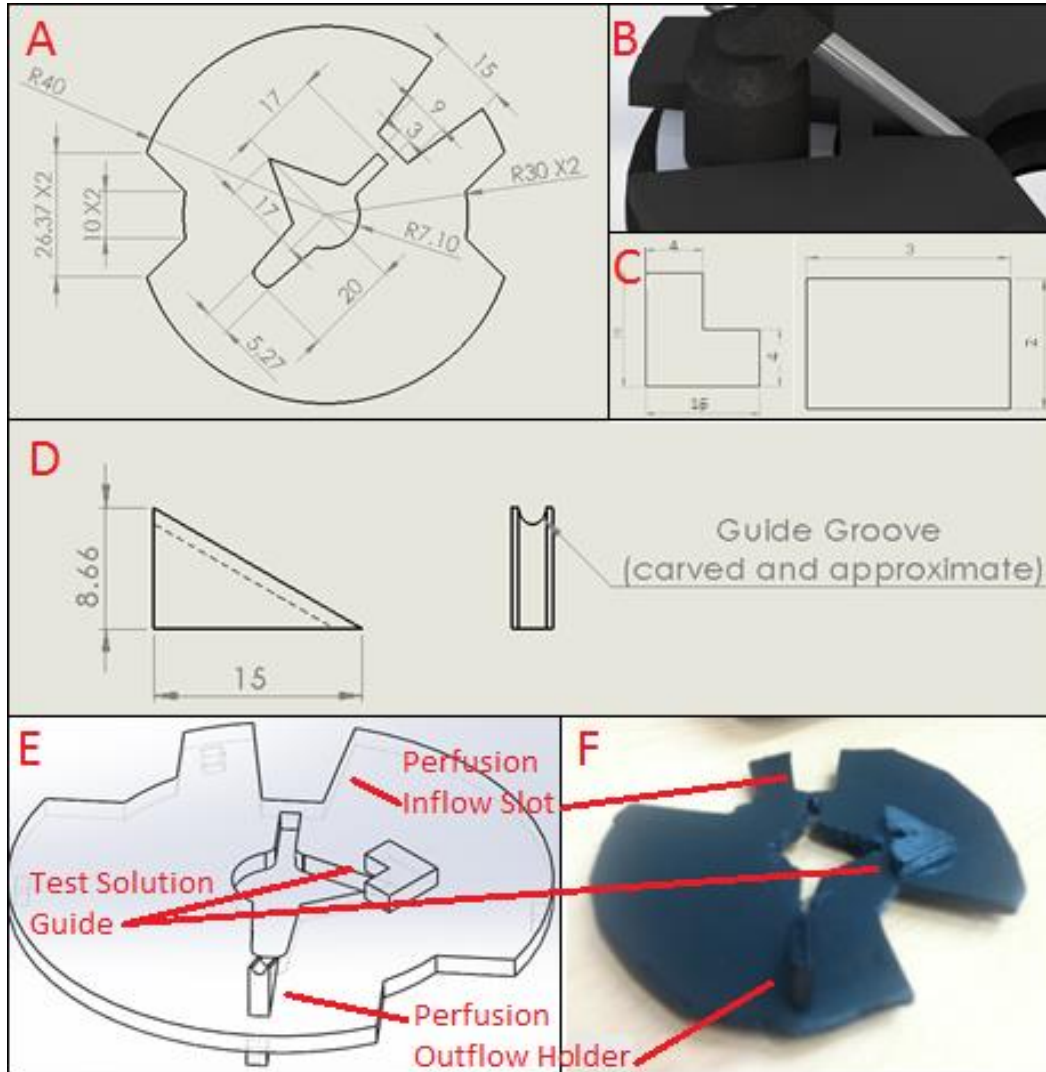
Components of the first prototype design; (A) dimensioned drawing of the disc which formed the basis of the first prototype design, with cutouts on the left and right to allow for access to the thermal control plug-ins, a teardrop-shaped groove at the 10:00 position that helps to stabilize the micropipette used to inject the test solution into the slide chamber, and two cuts at 90 degree angles from the orientation of the teardrop shape to allow access to the slide for the perfusion inflow and outflow systems, respectively, (B) computer model of the magnetic perfusion inflow holder in contact with two notched edges of the disk, (C) additional components to be glued to the main disk, (D) a guide component for holding the test solution micropipette, (E) a computer model of prototype one, showing the slot for the perfusion inflow system, the holder for the perfusion outflow pipette, and the test solution in guide system, and (F) the assembled disk of prototype one
